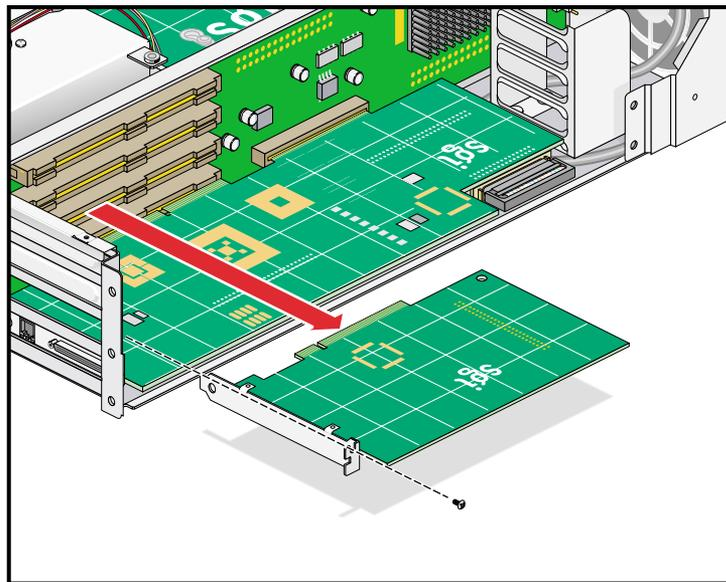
Removing the Retaining Screw and Extracting a Card
